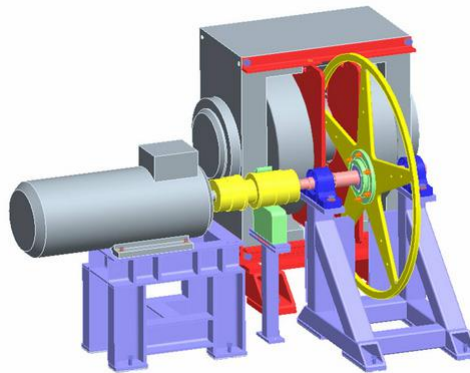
ILC target wheel prototype. Target rim (yellow) immersed in pole caps H-frame dipole magnet (two gray cylinders with the target wheel between them). The motor used to rotate the wheel is shown on left (gray). The yellow cylinder on the drive shaft is a torque transducer which was used to measured the torque. This figure was reproduced from [47].
